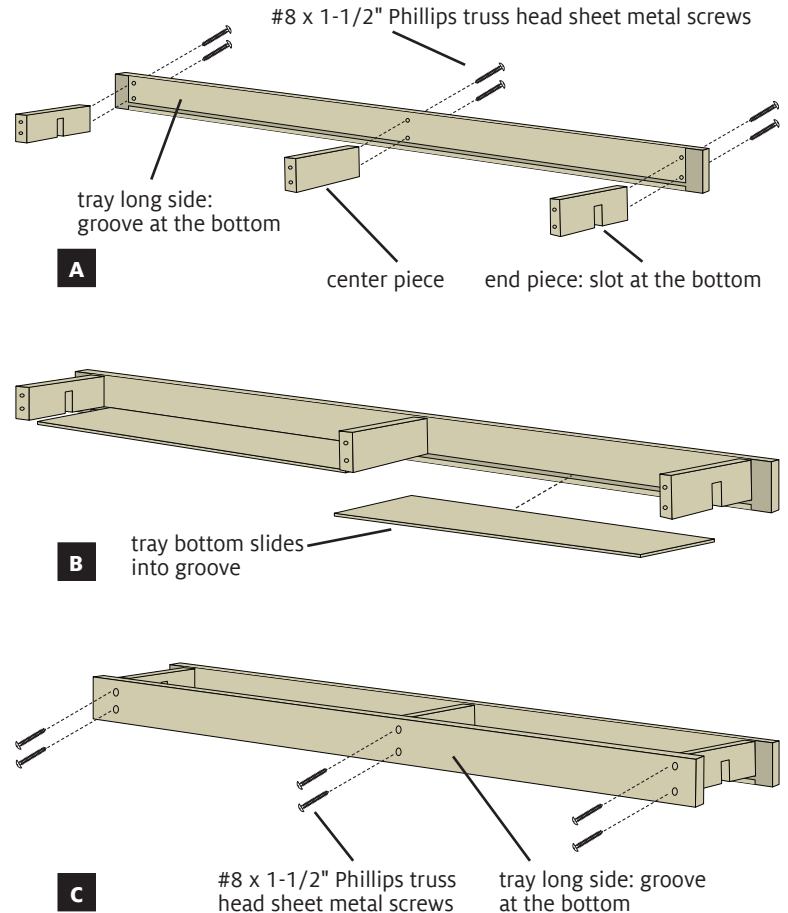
ASSEMBLE THE HIGH CASTLE ACCESSORY TRAY (HIGH CASTLE LOOMS)
